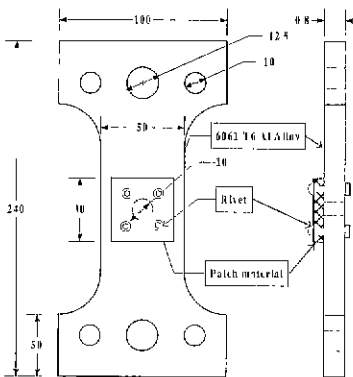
Shape and dimension of rivet-jointed patch repair aluminum plate specimen with crack hole.
